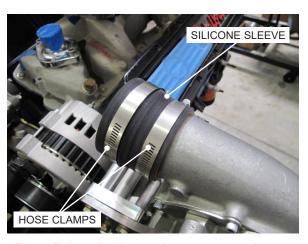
F: Install silicone sleeve to supercharger (YSi-Trim shown)
